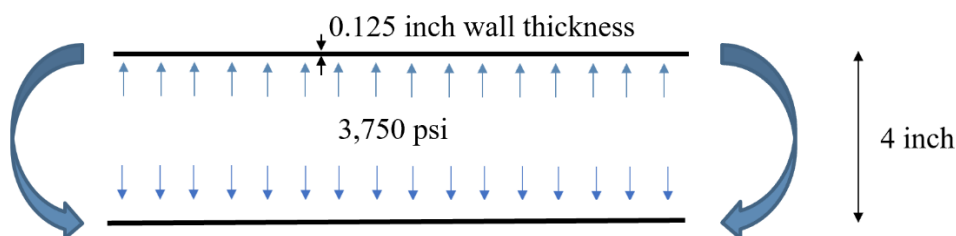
Section View of a Tube, with the Pipe Running Horizontally
